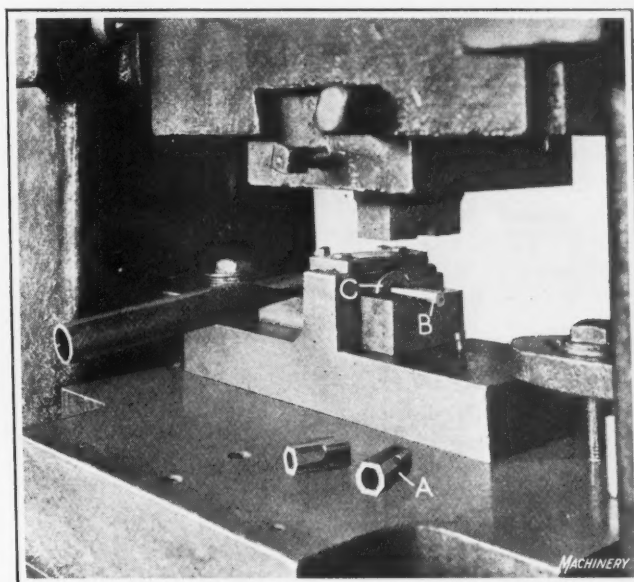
Restriking the Wrench Sockets after the Hexagonal Hole has been drawn
